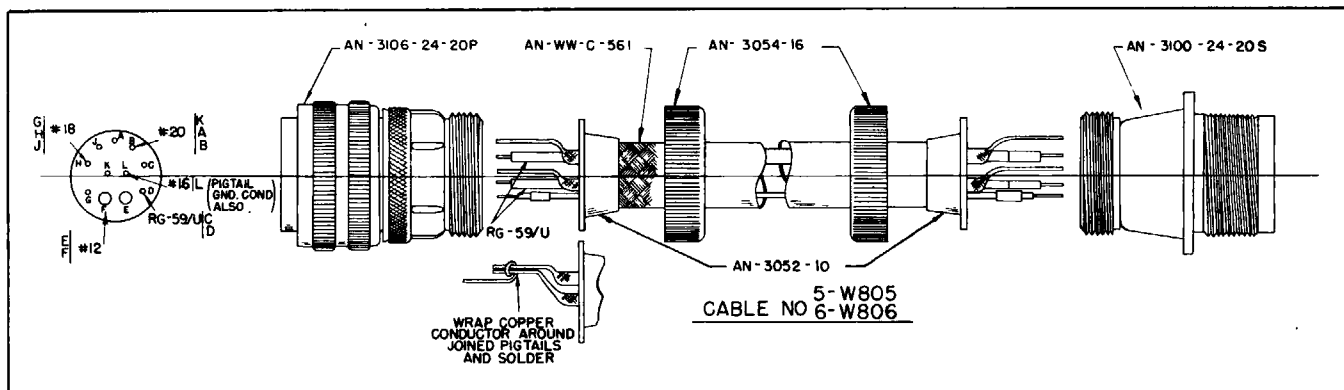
Cable Assembly—Cables No. 5 and 6
